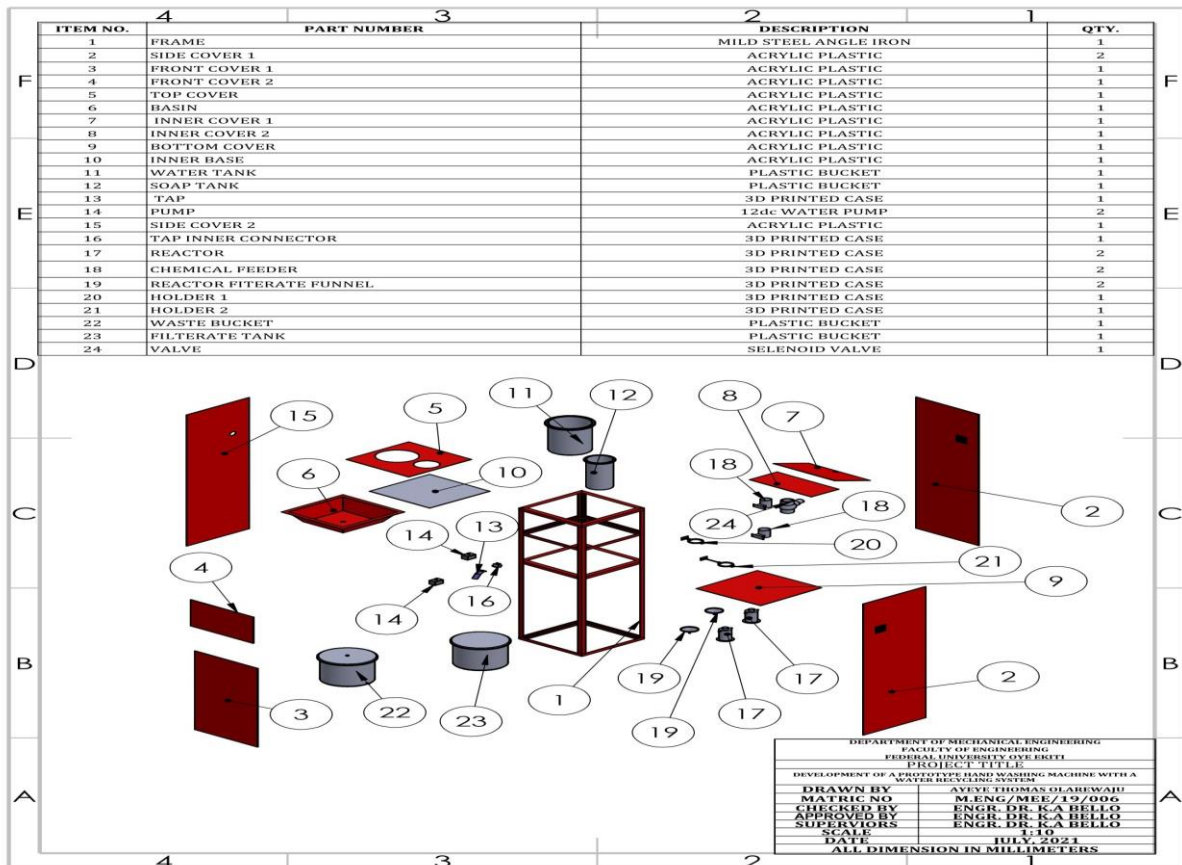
Exploded diagram of the Hand Washing Water Recycling Machine
